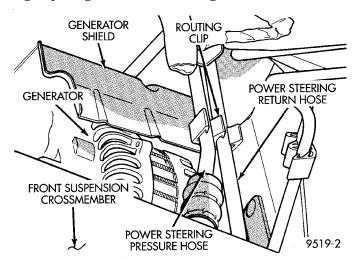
Power Steering Hose Routing Clip At Generator Shield
